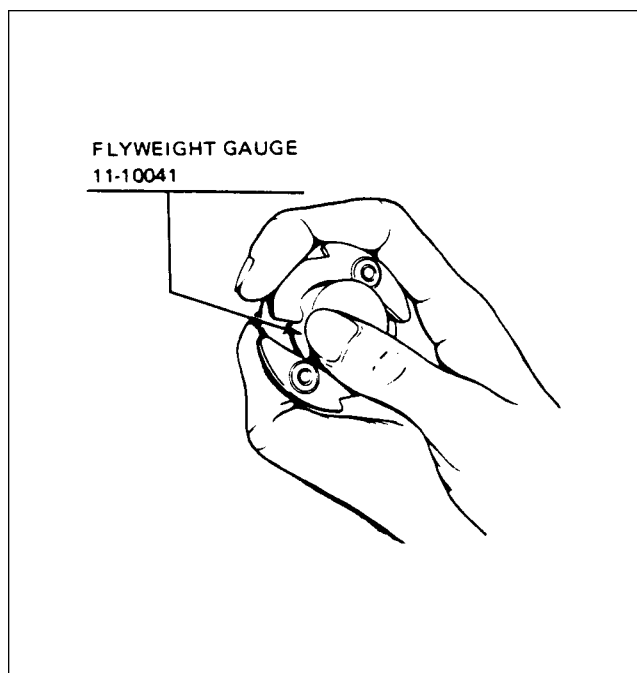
Checking Flyweight Radial Wear with Gauge
